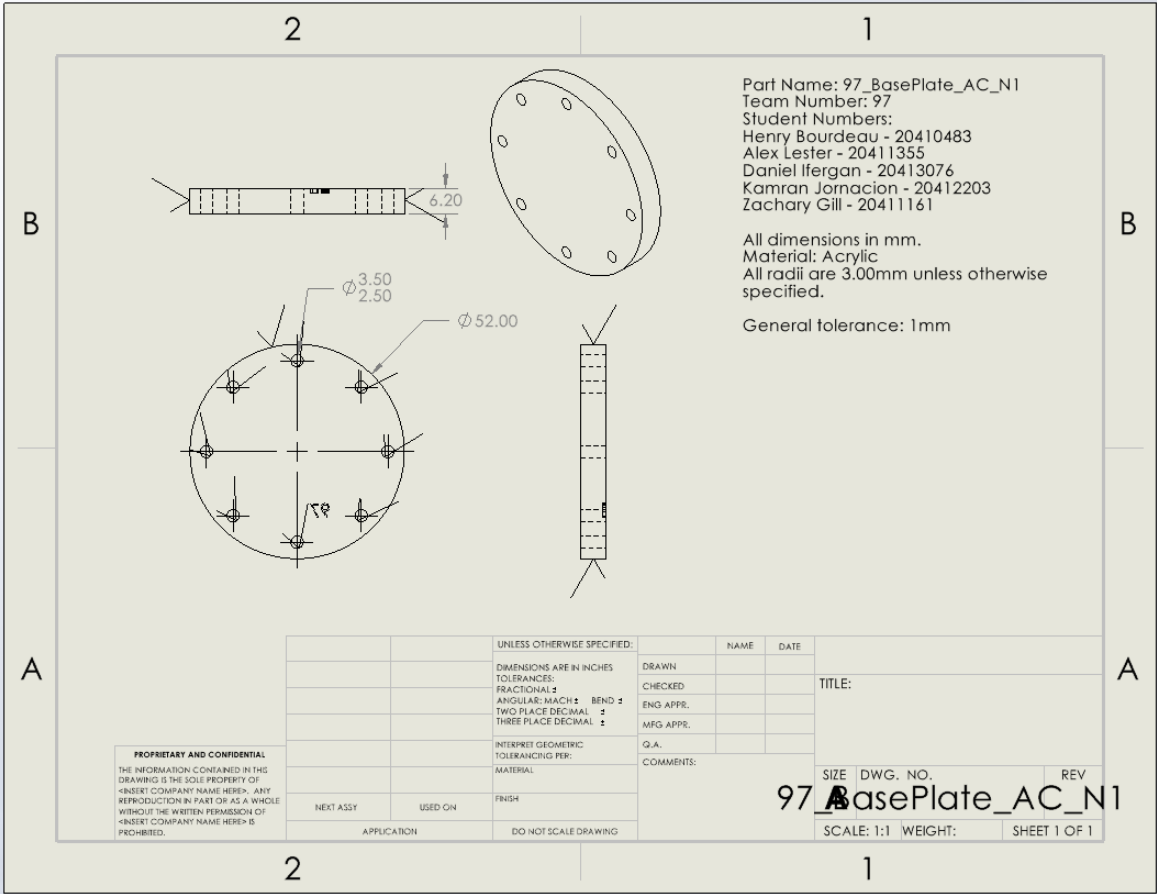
Working drawing for 97\_BasePlate\_AC\_N1
